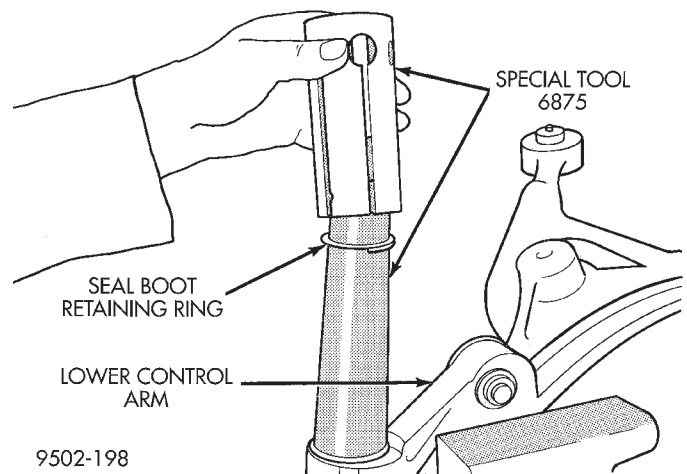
Retaining Ring And Expandable Collar Installed On Tool
